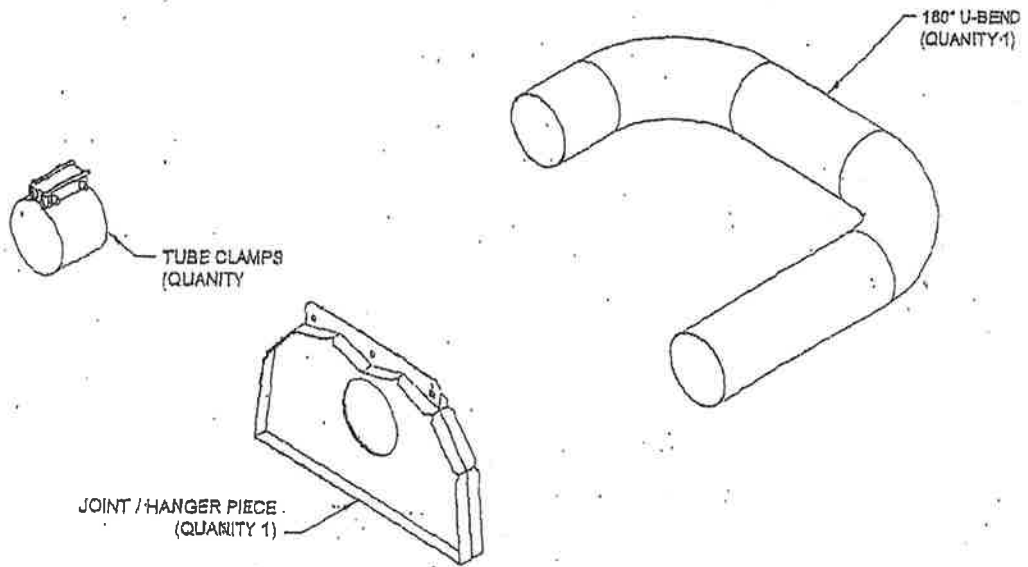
180° U-BEND PACKAGE CONTENTS.
